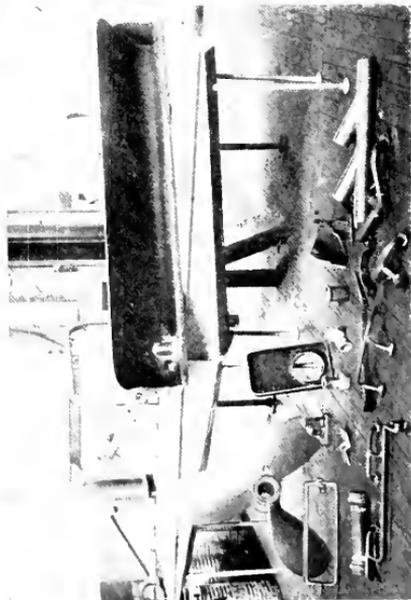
Small Welded Fittings from the Plumbing Shop
